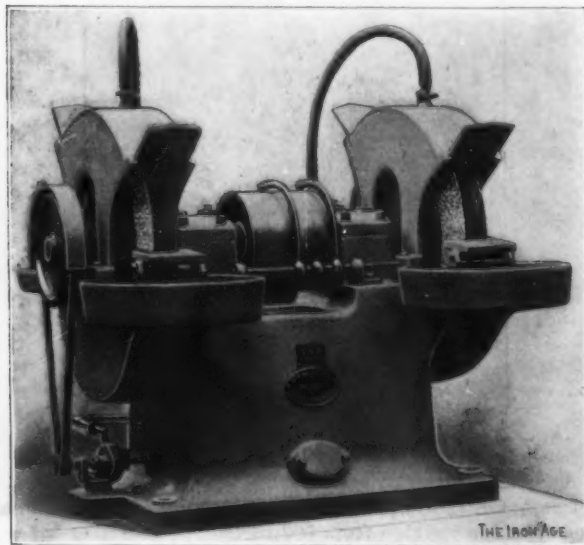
A Double Wheel Grinder Otherwise Similar to the One Shown in Fig. 4.
